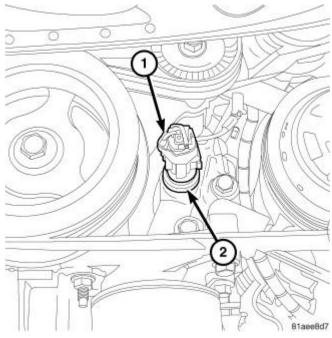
OIL PRESSURE SWITCH Courtesy of CHRYSLER LLC
